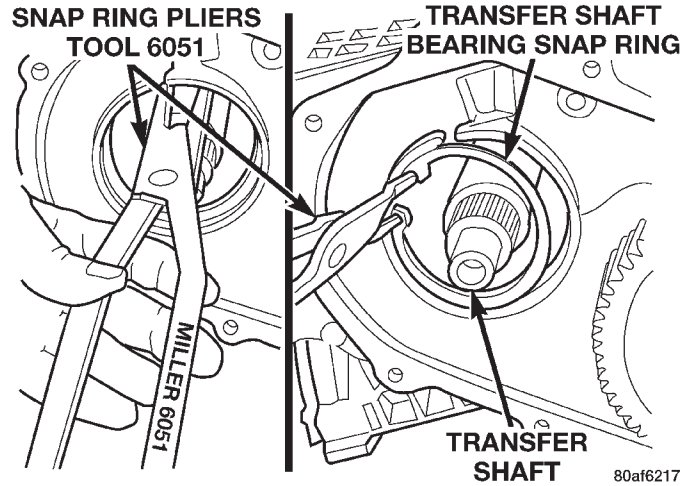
Remove Transfer Shaft Bearing Snap Ring
